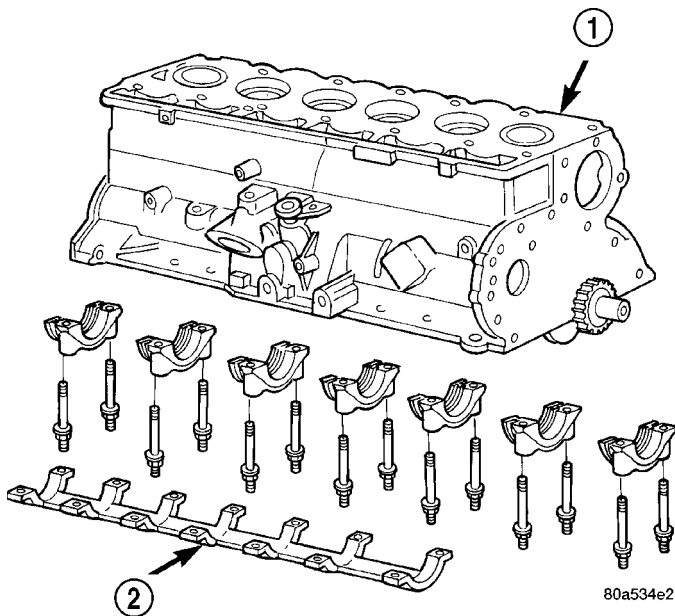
4.0L Cylinder Block with Main Bearing Caps and Cap Brace
